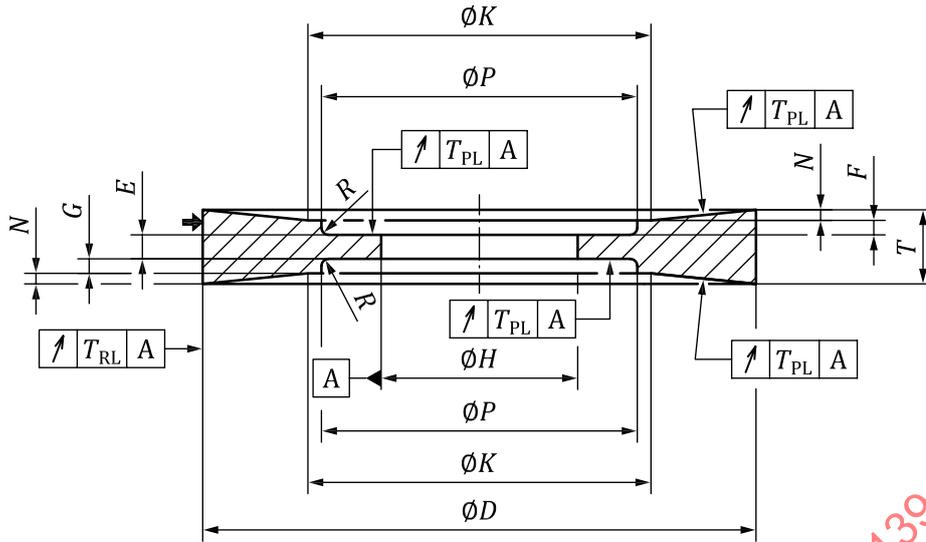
Grinding wheel, relieved and recessed on both sides (Type 26)
